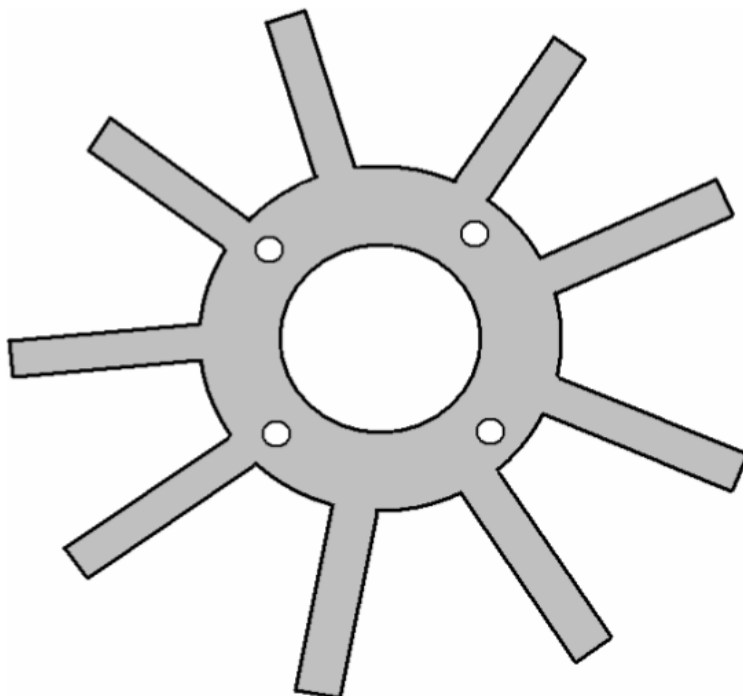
Mounting for the outer tubes is a piece of steel plate is cut with nine projecting arms.
